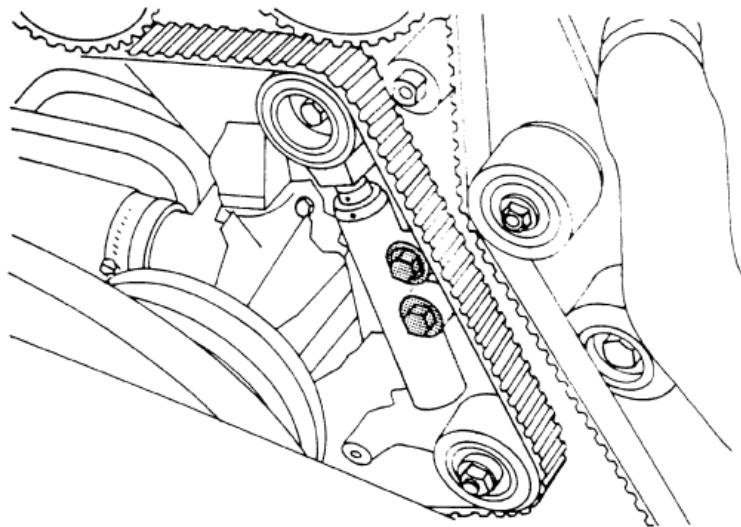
Remove the tensioner bolts in order to remove the timing belt
